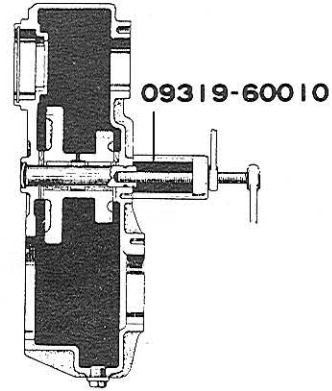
Removing Transfer V5080 Idler Gear Shaft G2373
